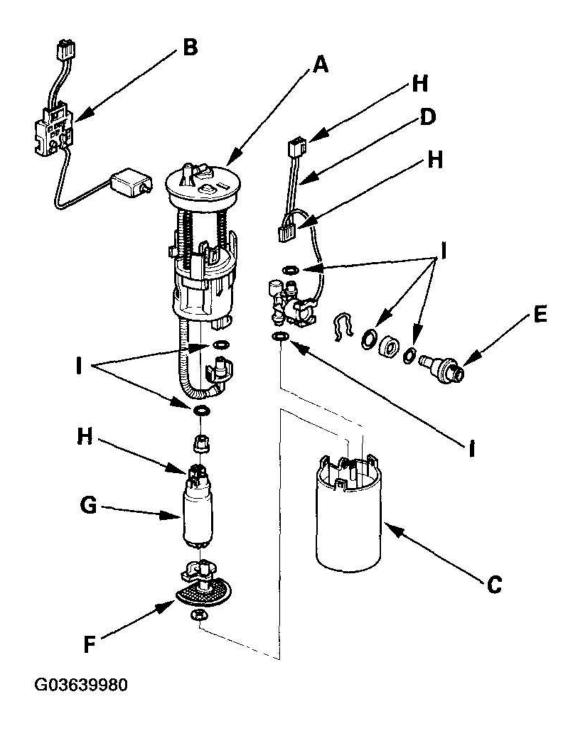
Removing Fuel Filter, Fuel Level Sensor (Fuel Gauge Sending Unit), Case, Wire Harness And Fuel Pressure Regulator
